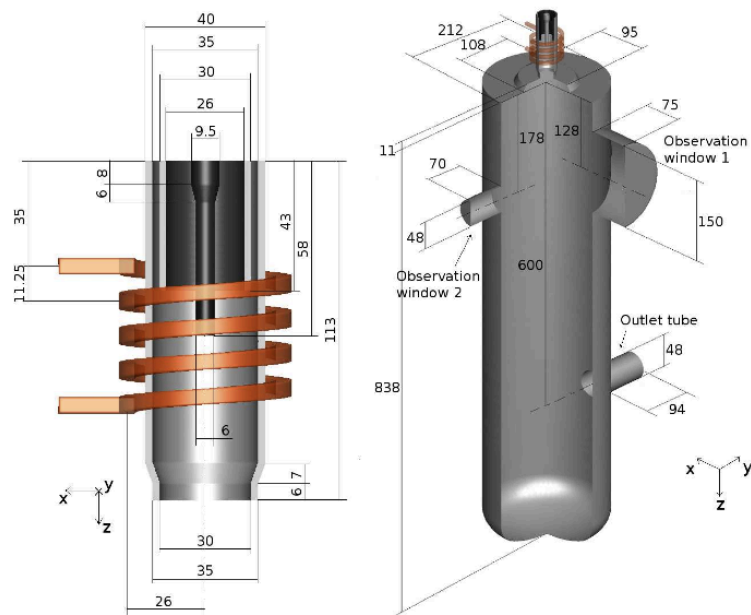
Detail of the PL-35 torch geometry and reaction chamber geometry - dimensions in mm. (taken from Ref. ³)
